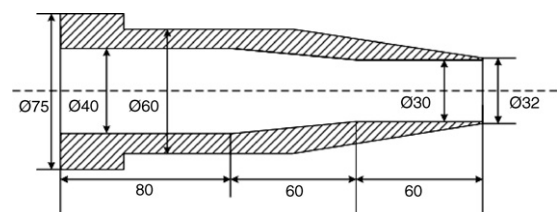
Cross-section of the nozzle with all dimensions in millimeters.
